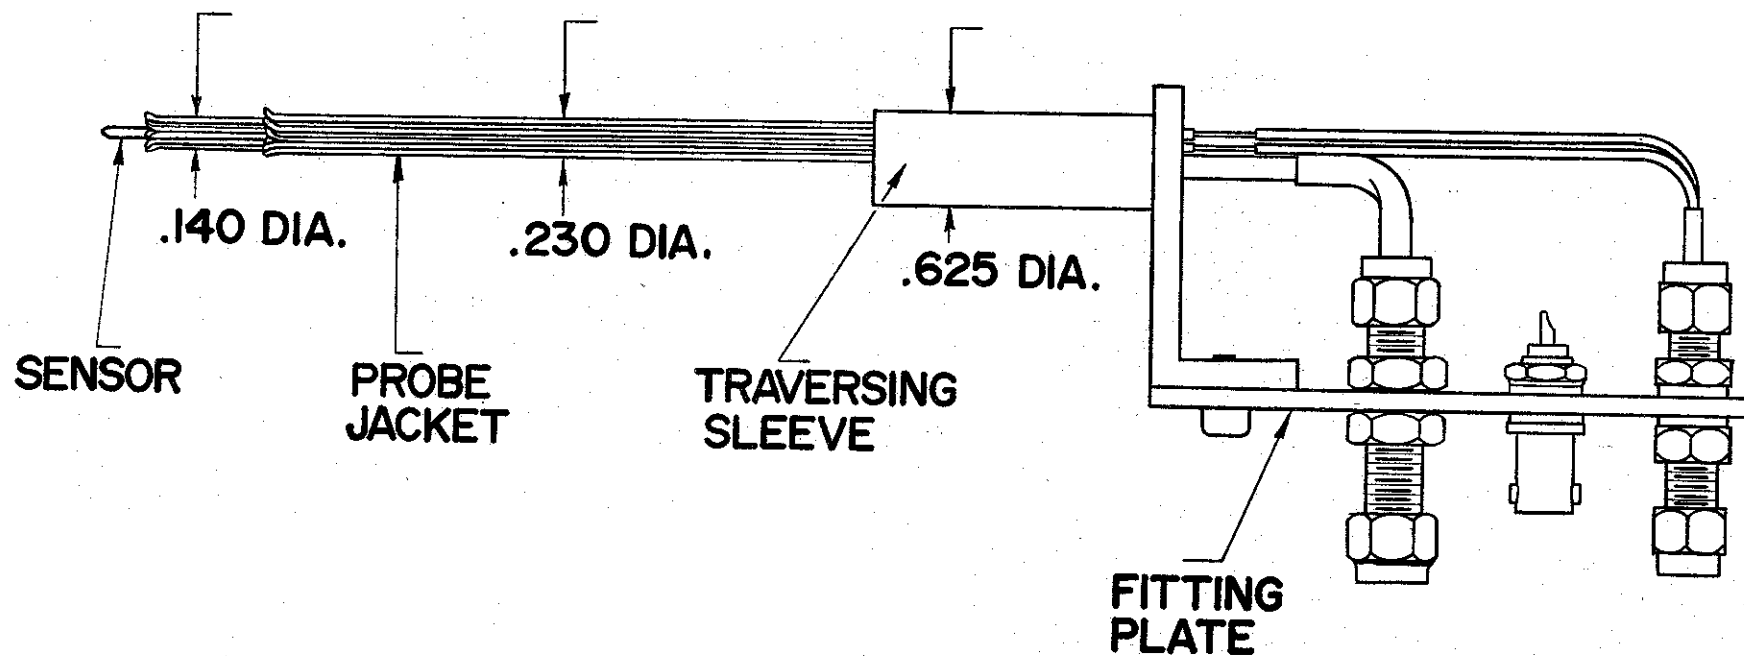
DIAGRAM OF PROBE WITH SENSOR HOLDER INSERTED
